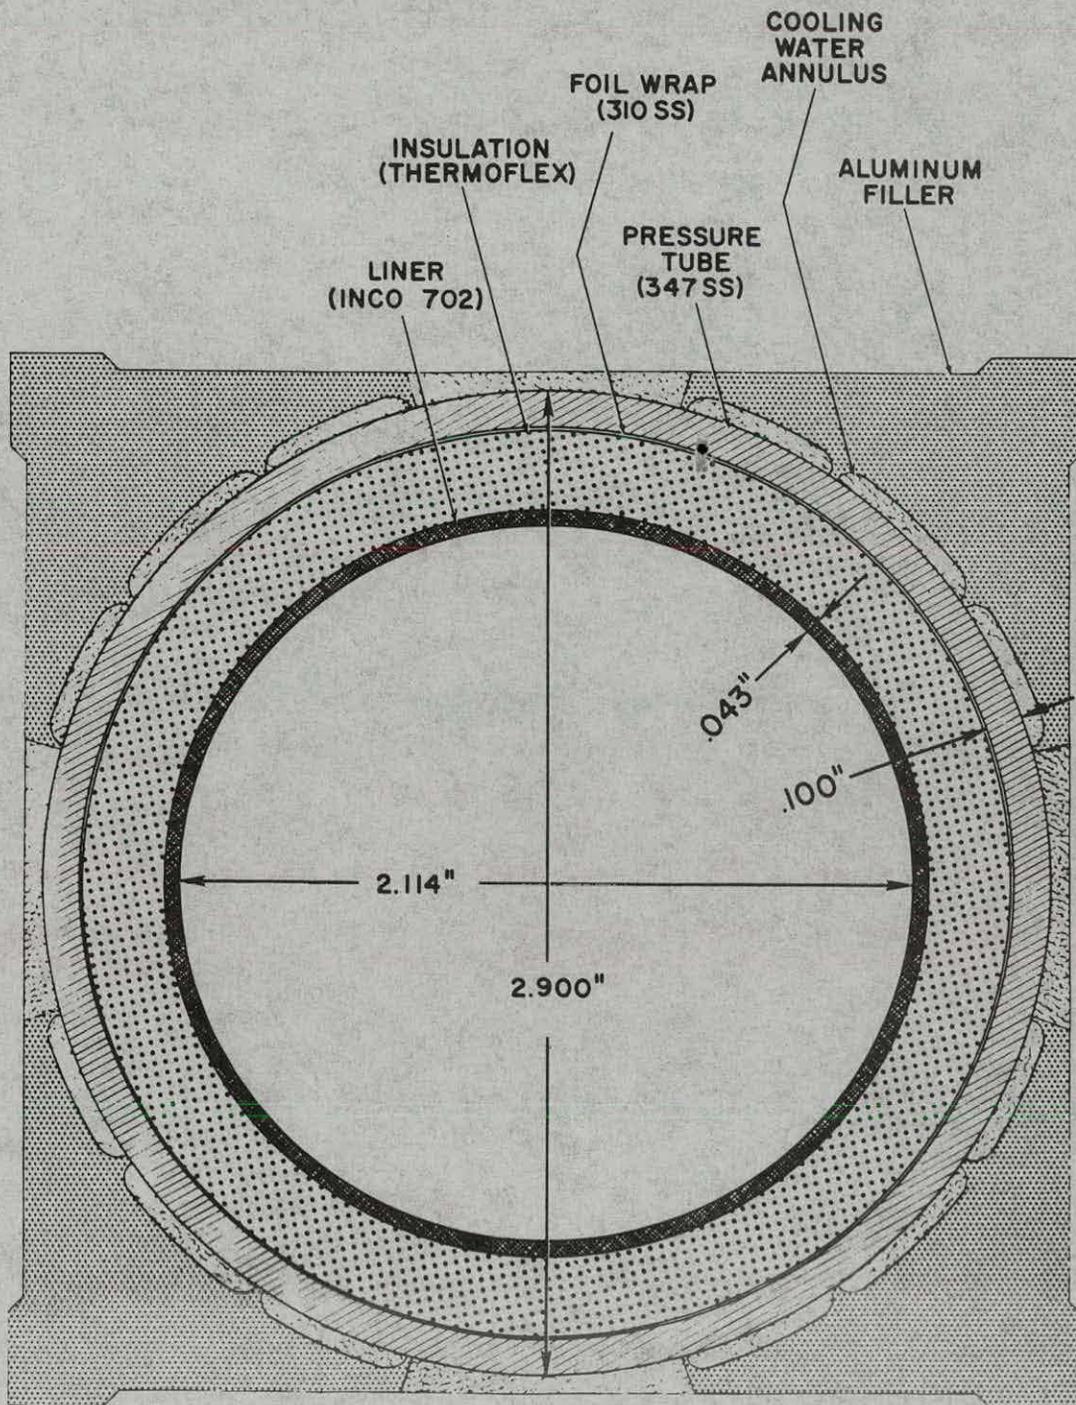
ETR 33 Facility Section Through Core (D.I. 339)
